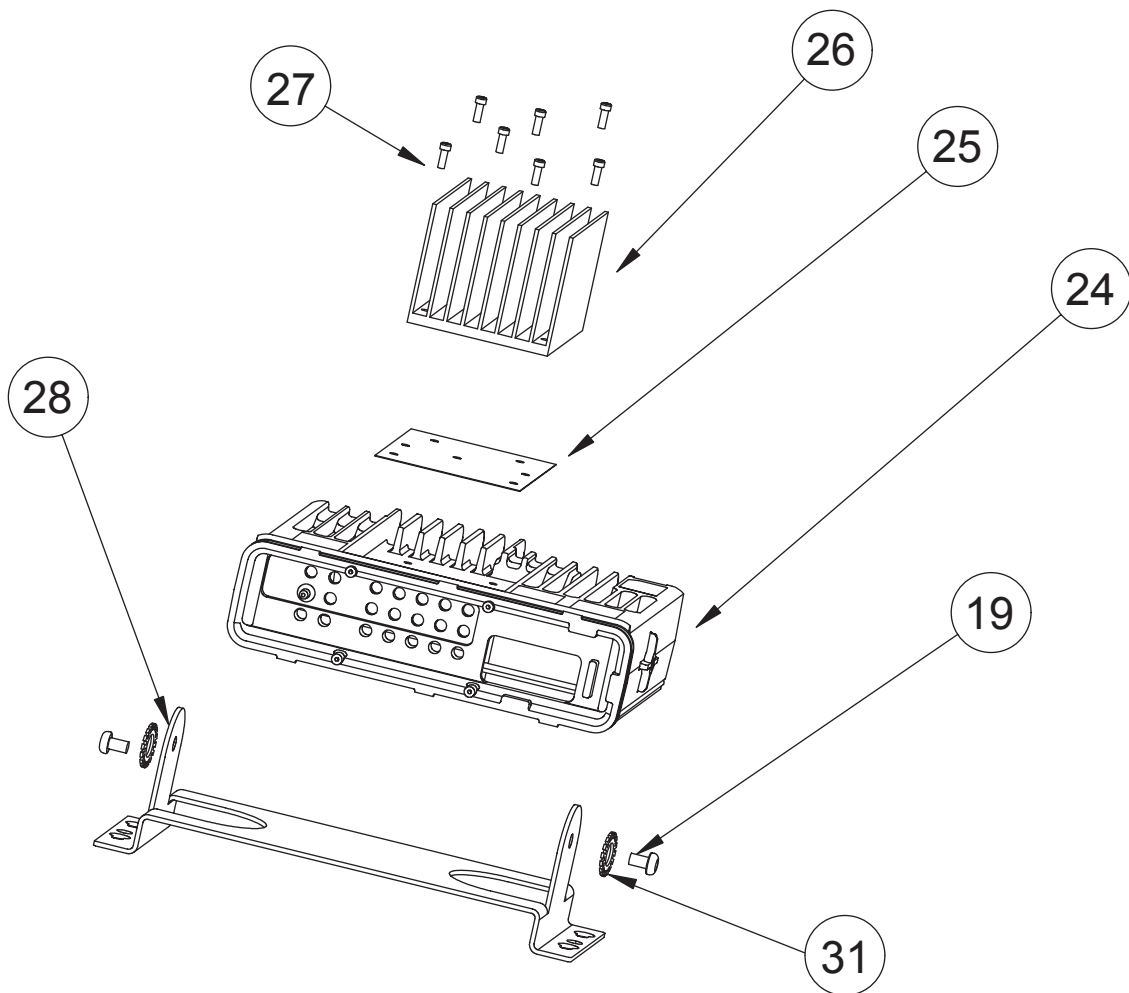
Repeater Assembly Exploded View (VHF/UHF 32 MB Repeaters)
